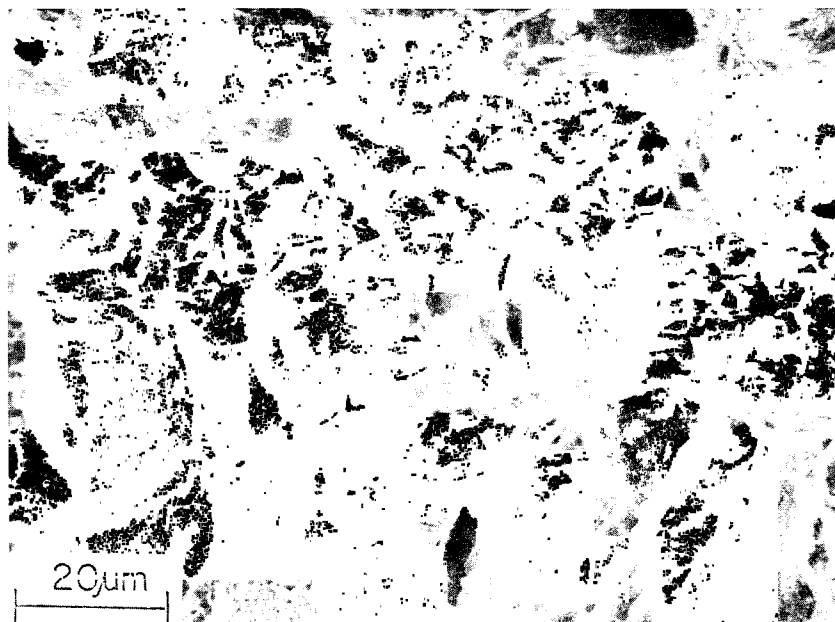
Code-C specimen: fast-fracture area showing cleavage and MVC
